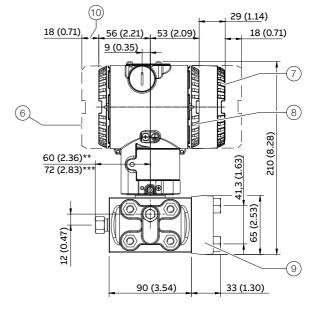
Flat bracket for pipe mounting – barrel housing, Dimensions in mm (in)
